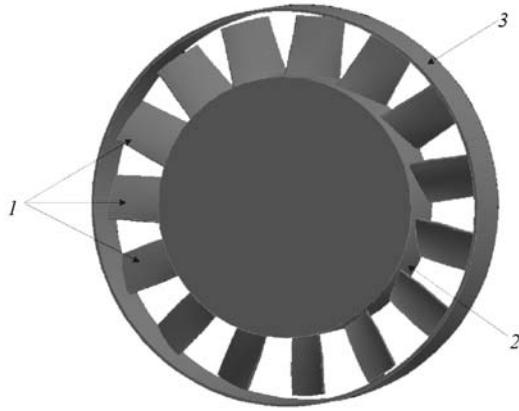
Configuration of the first impeller blading: 1) blades; 2) hub; 3) housing.
